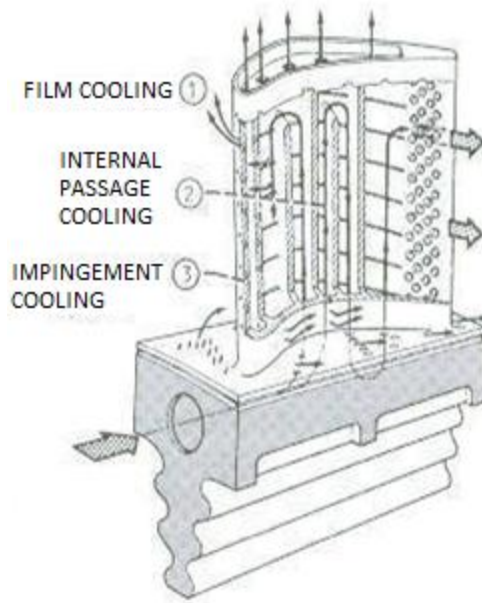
Rotor Blade Cooling Configuration (Gladden, 1988)
